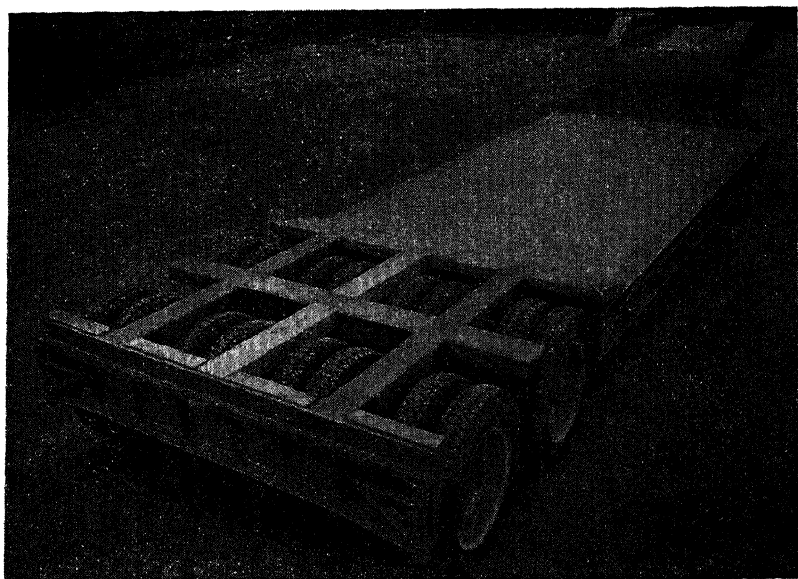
30-ton welded trailer for hauling heavy construction machinery. Formerly of riveted construction. Welding reduced weight 750 lbs., cost 10%, construction time 10%. Increased strength and rigidity enabled the trailer to carry 15% heavier loads.
